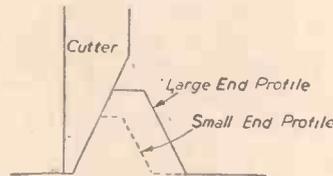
Straight-edged cutter fits crown wheel tooth at both ends.
